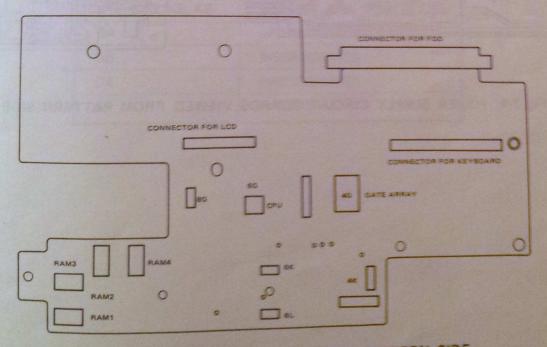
MAIN P.C.B. VIEWED FROM PATTERN SIDE
